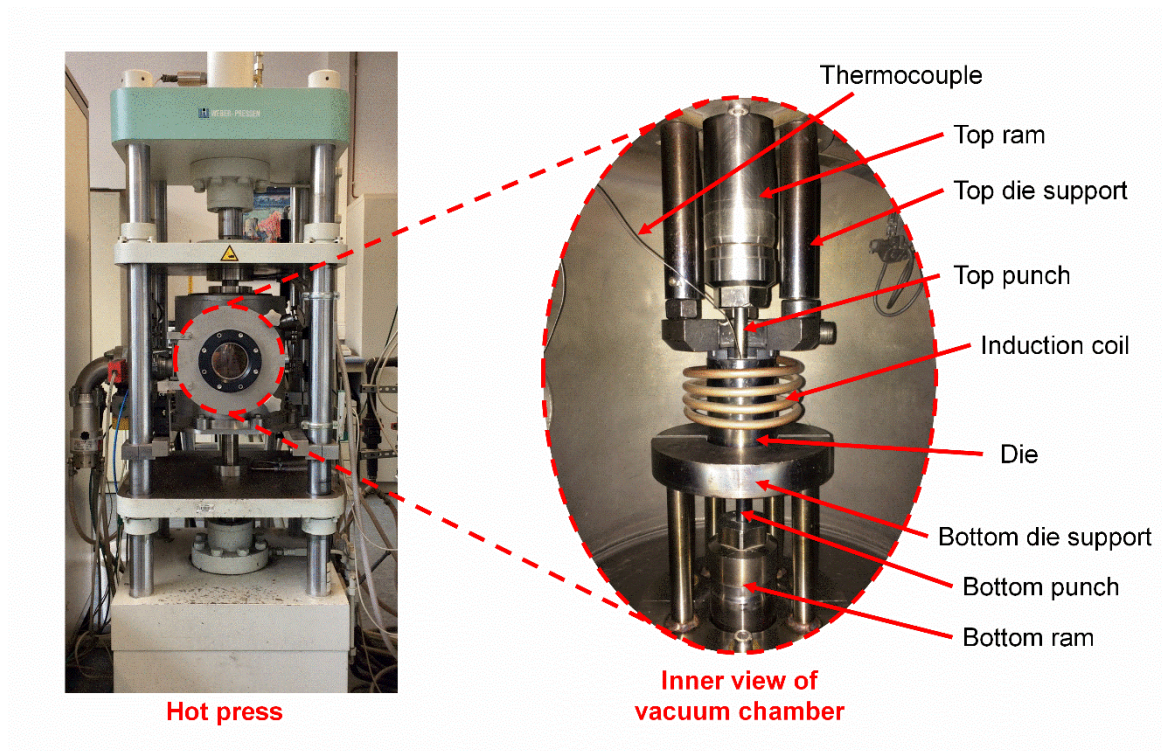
Hot press machine used in this work along a view of its vacuum chamber.
